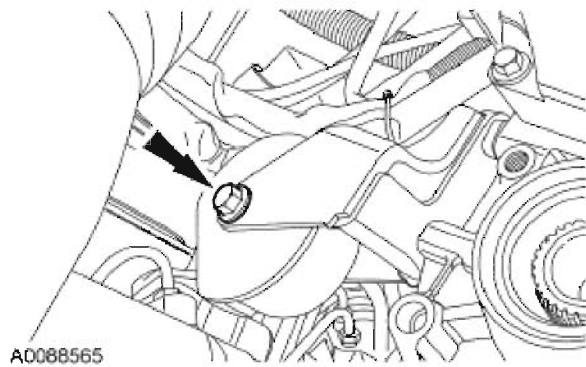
Locating Engine Mount Bracket Bolt
